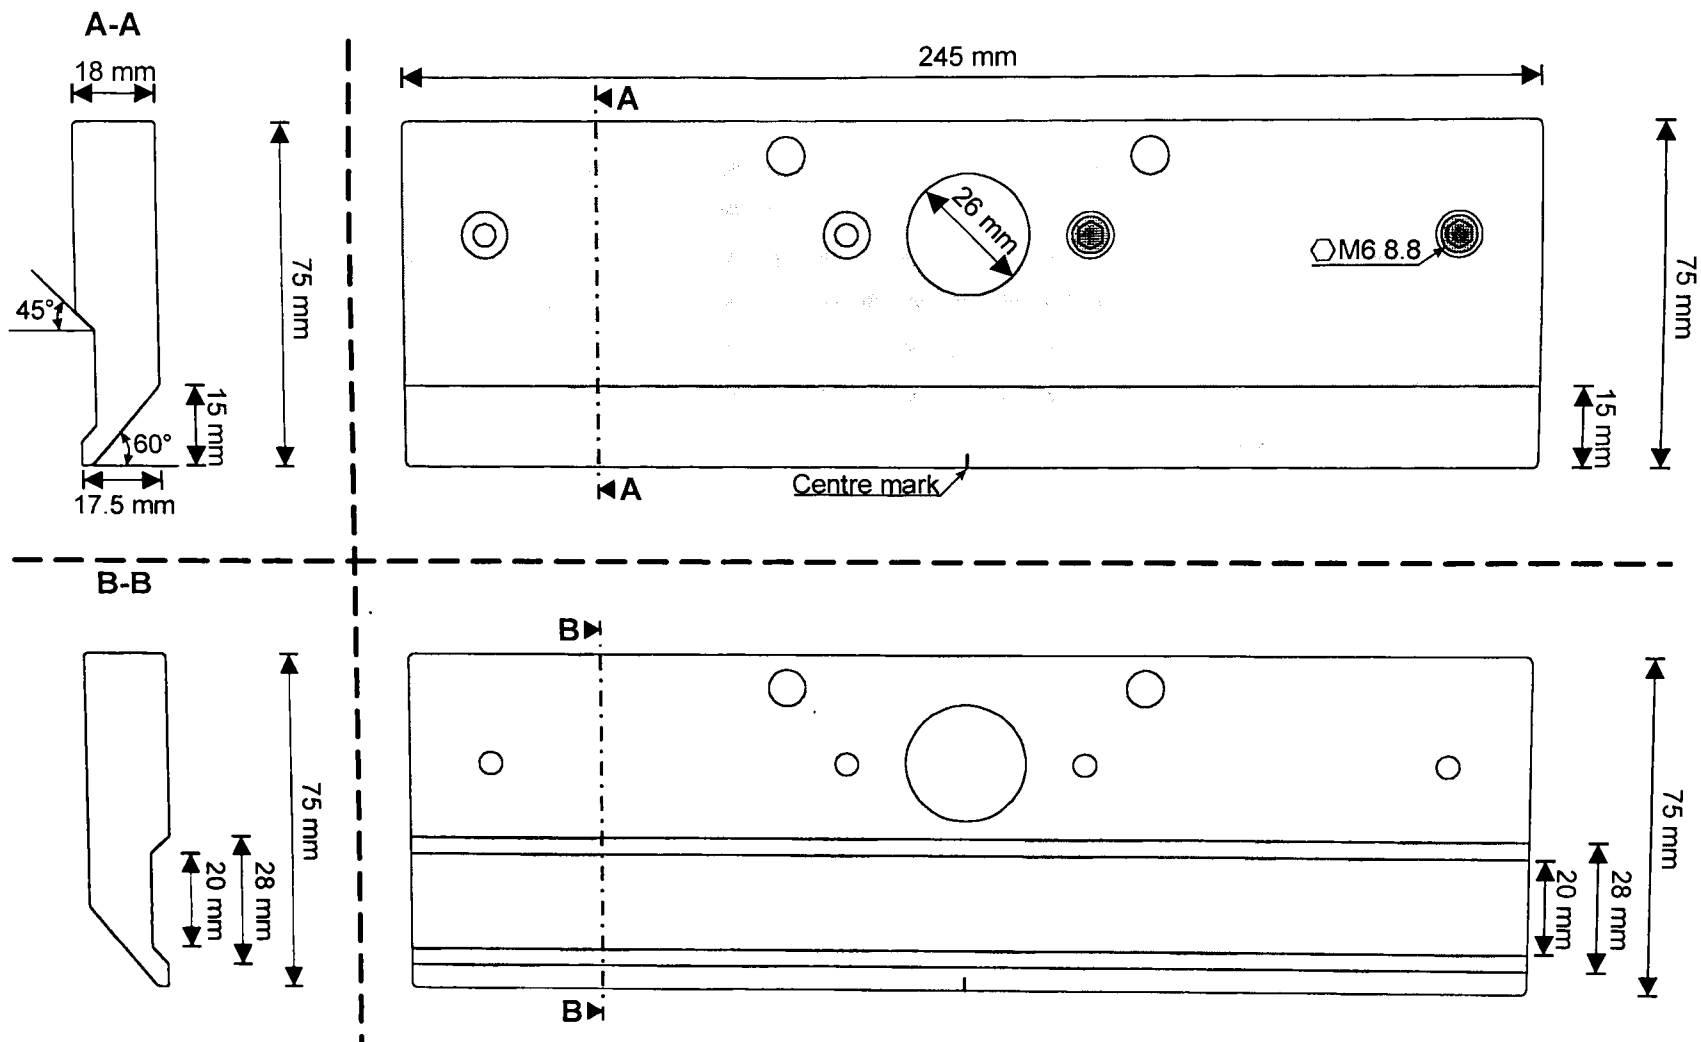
Profiled Clamps (recommended by Manufacturer)
